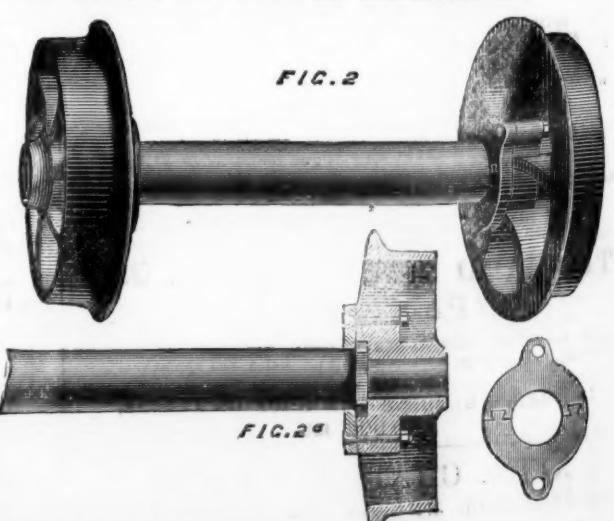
and 1a show a longitudinal view and plan of a pair of cast wheels and axles fitted up for outside bearings, and Figs. 2 and 2a for inside bearings. A A. are the wheels; B. is the axle; C C. the washers; D D. the bolts; E, the collar on axle B; and F, the recessed boss in the wheel.
